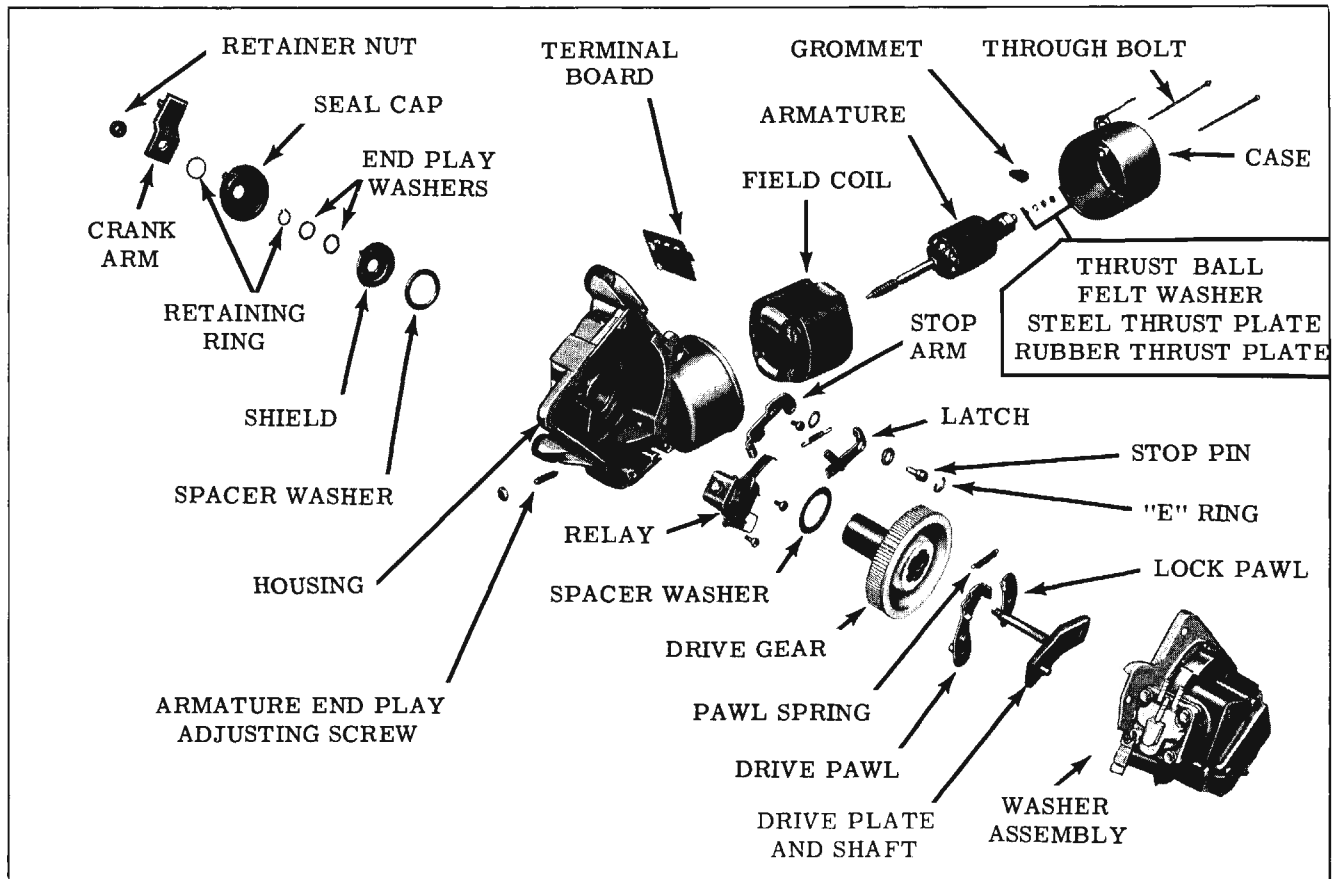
Wiper and Washer Assembly (Two Speed)
